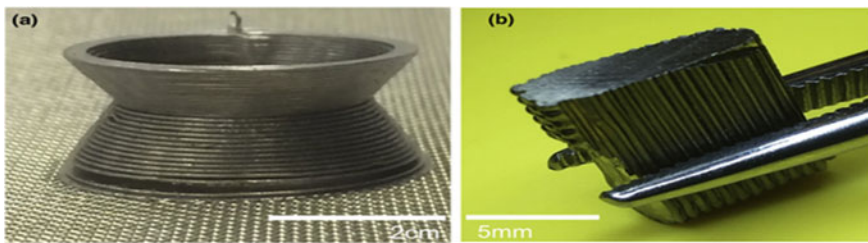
FFF printed part using BMG a continuous 3D printing b start-stop 3D printing [21]
